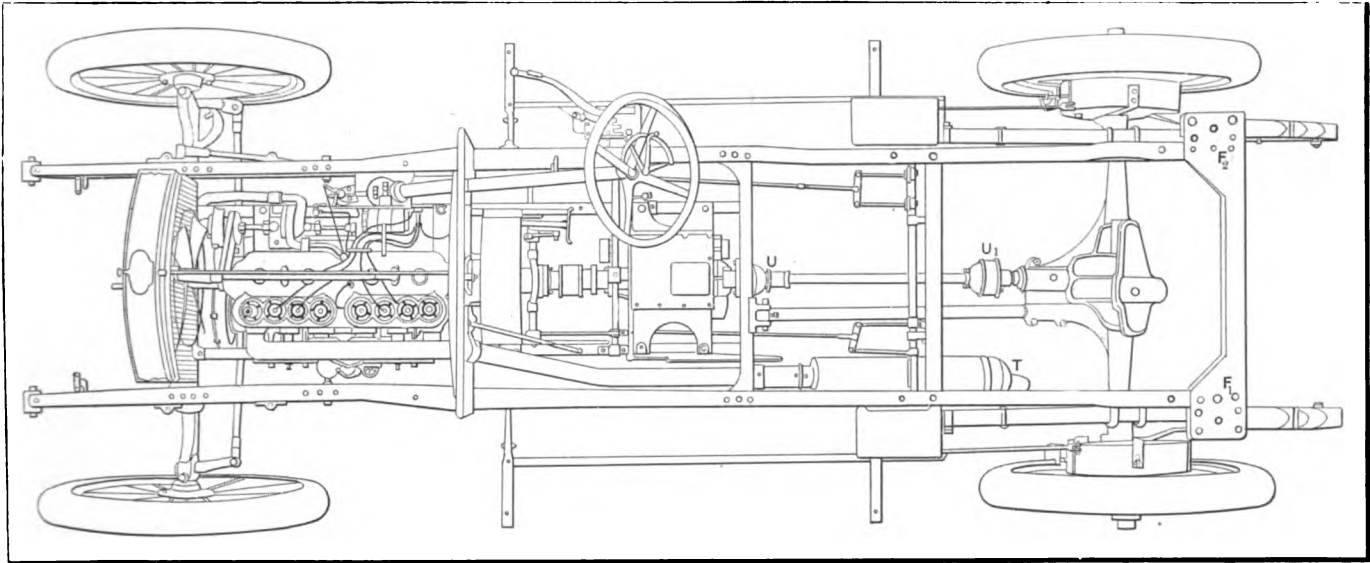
Plan view of the four-cylinder 40-horsepower chassis showing the general arrangement of the units
